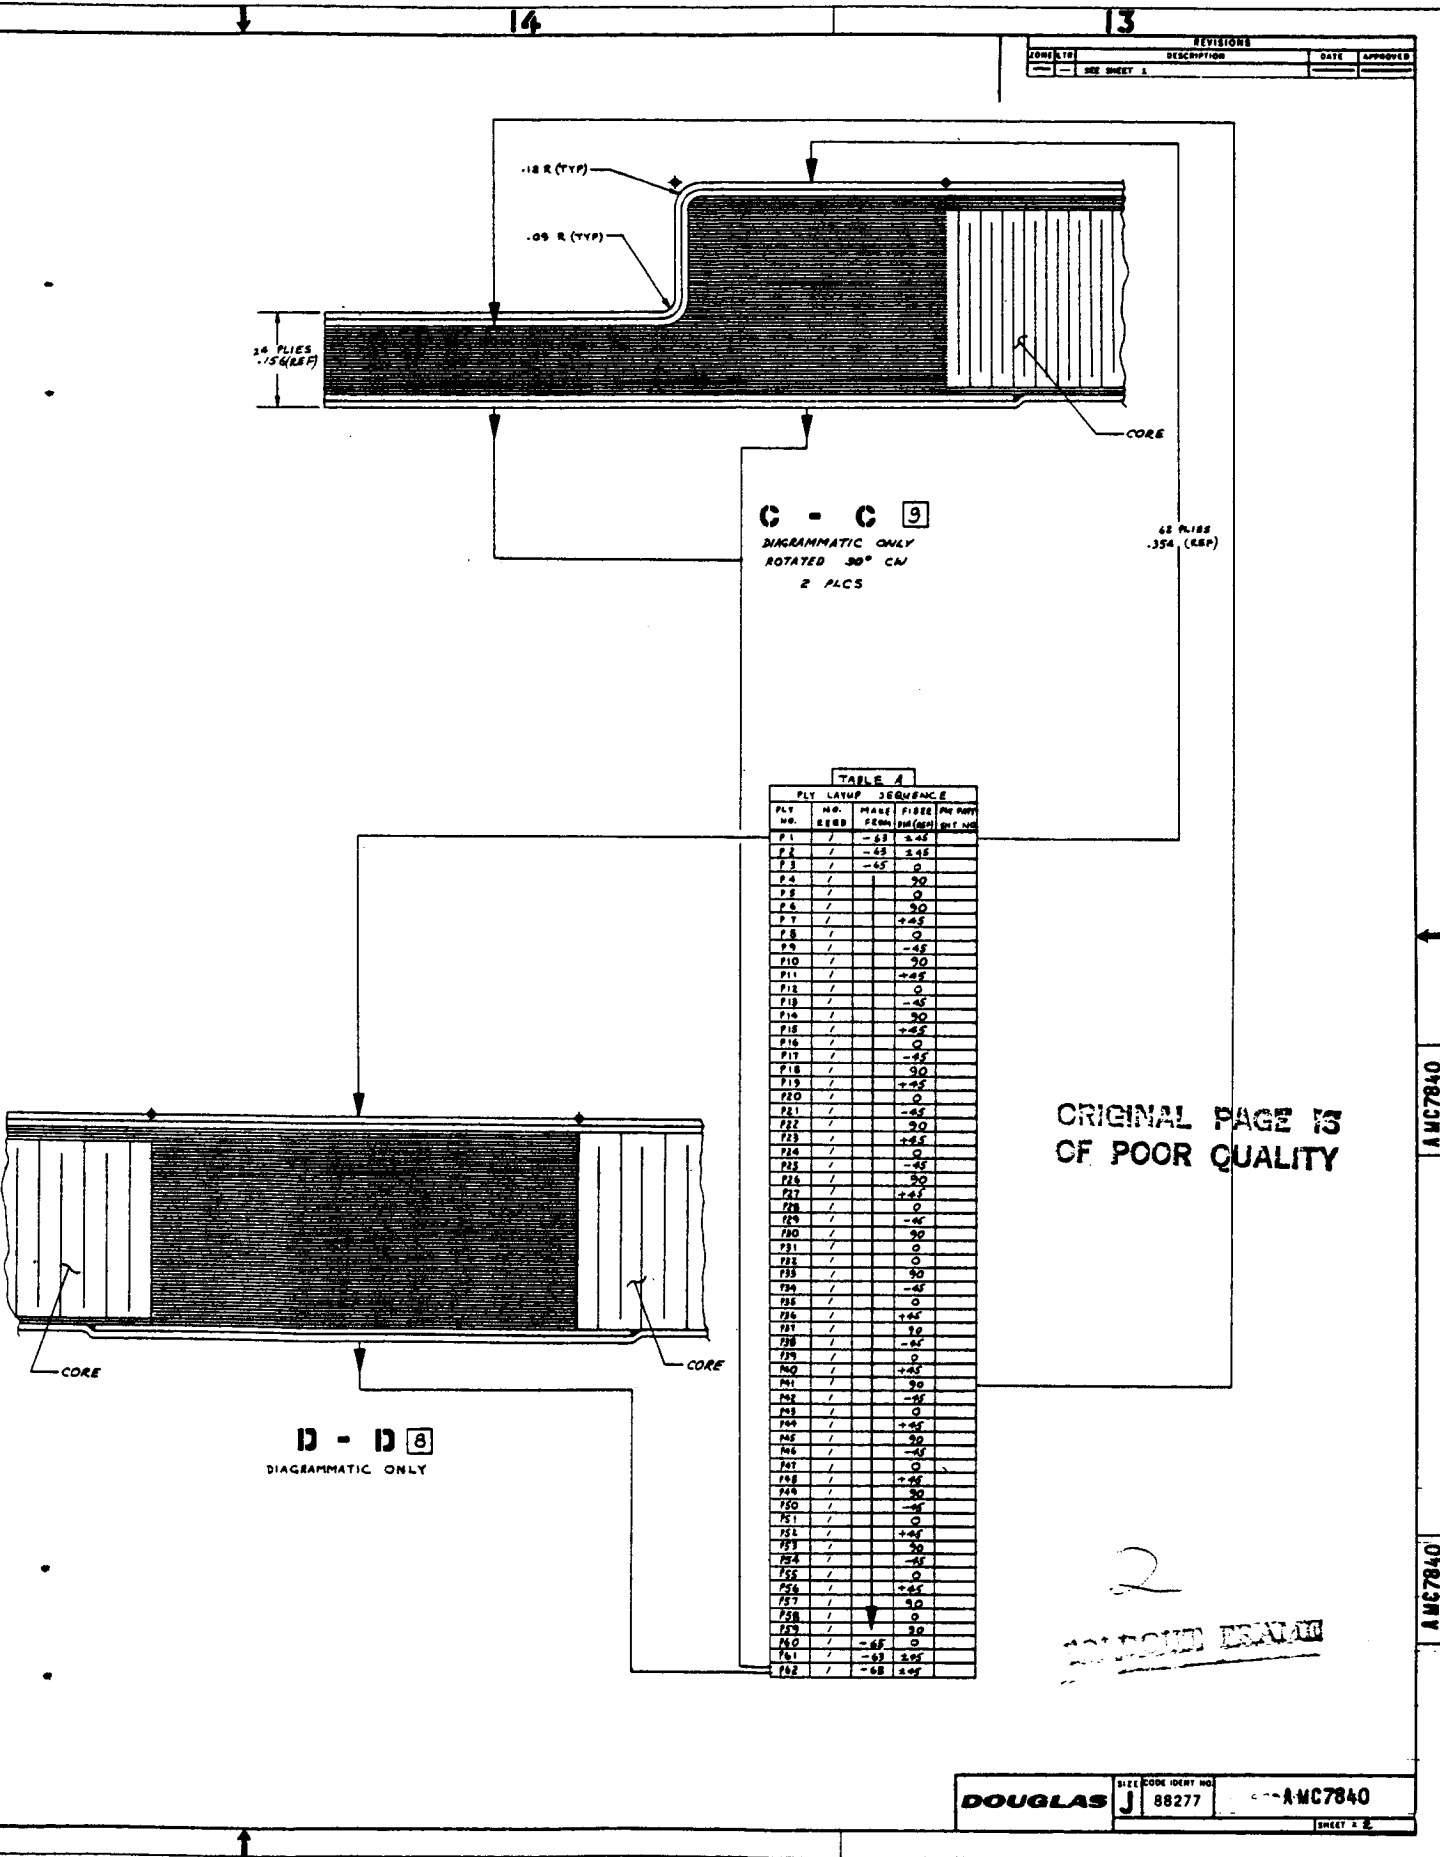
DRAWING AMC7840 - SKIN PANEL ASSEMBLY (SHEET 3 OF 4)
